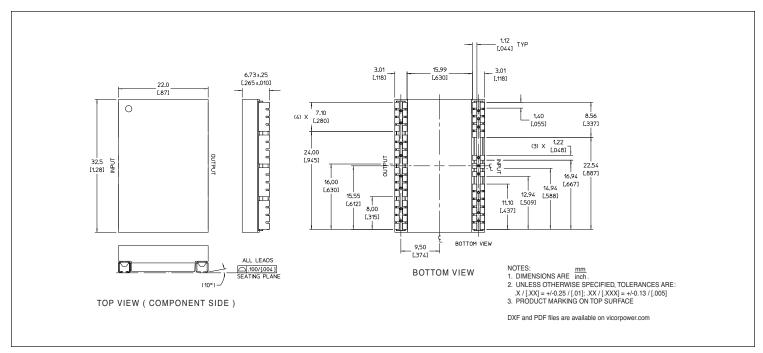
BCM[®] module J-Lead mechanical outline; onboard mounting
